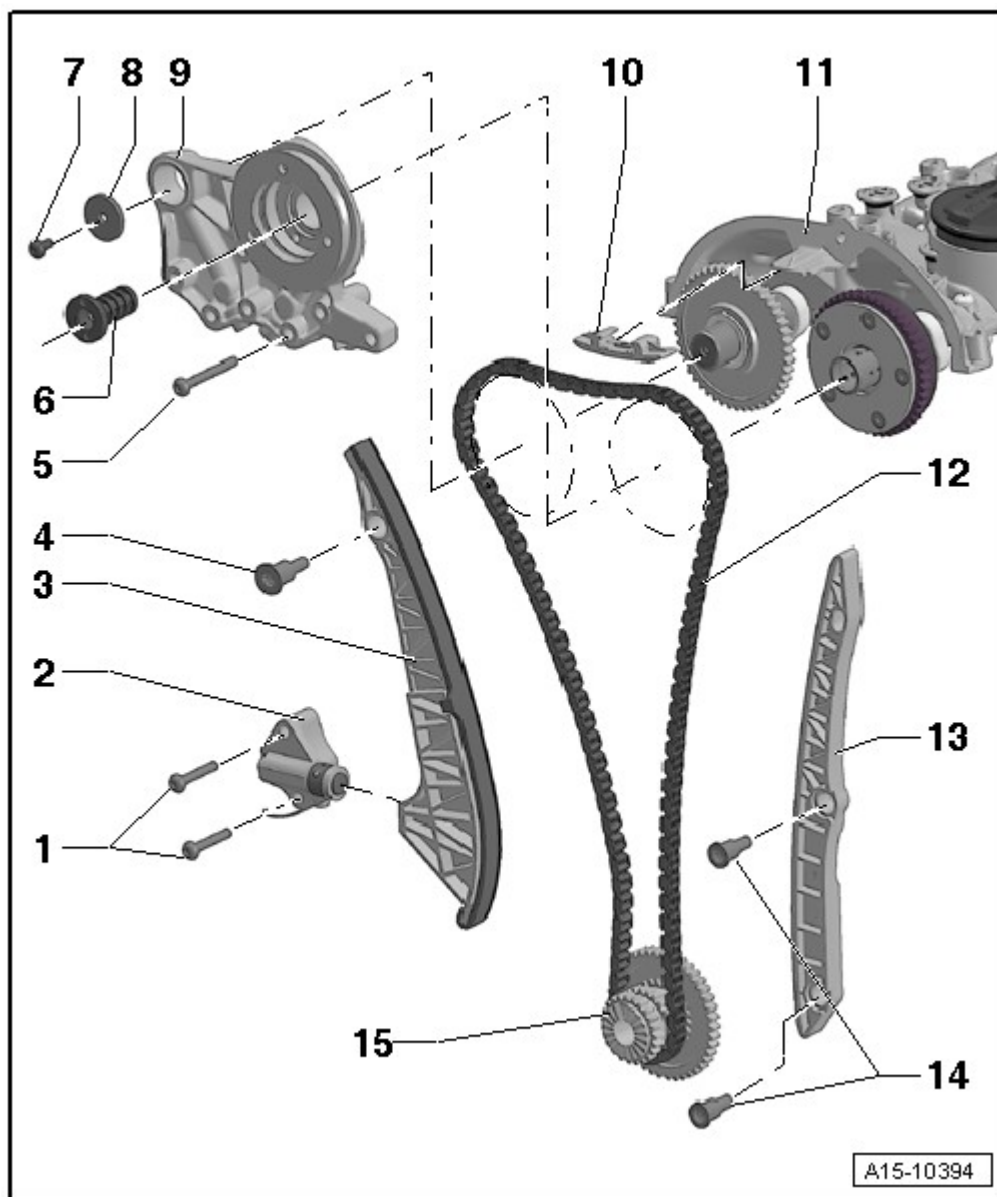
Identifying Camshaft Timing Chain Assembly Overview
